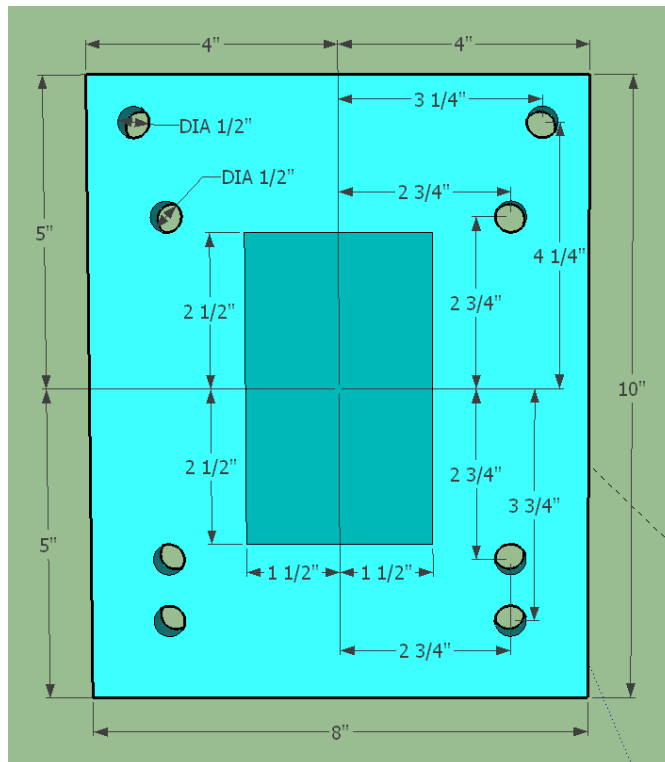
DST Sides-Plate of the Rectangular Specimens- Aluminum 1/2" thick.
